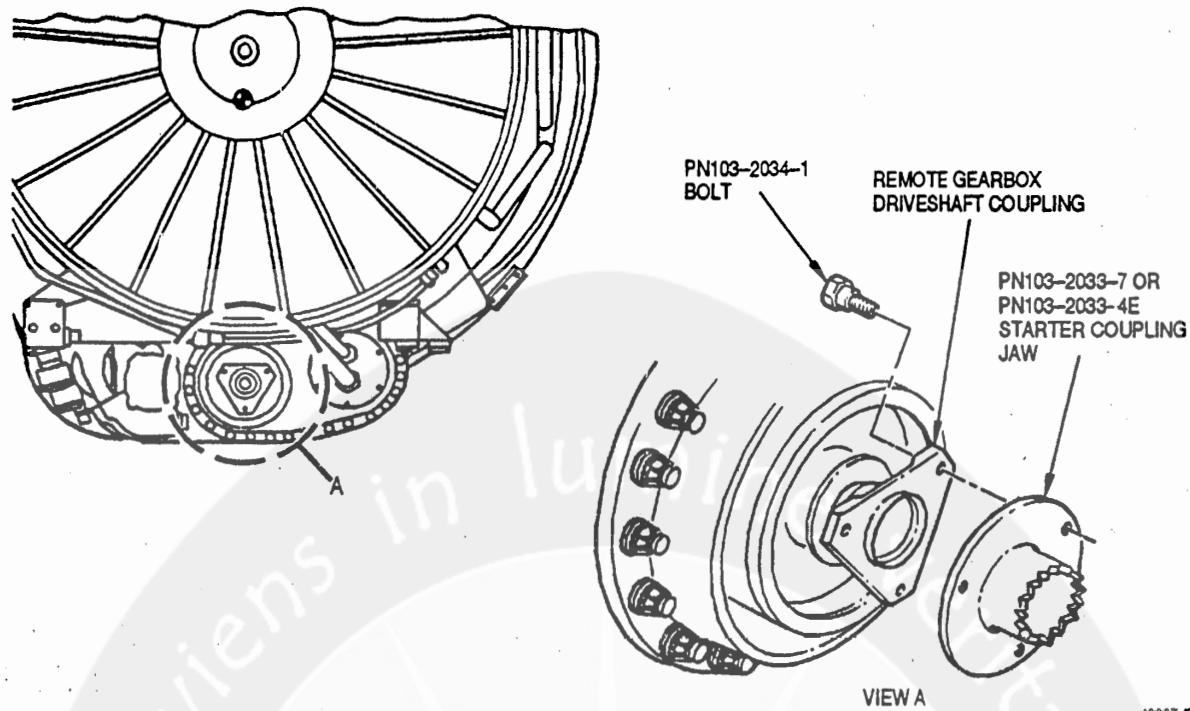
Starter Coupling Jaw Inspection (Sheet 1 of 2)
